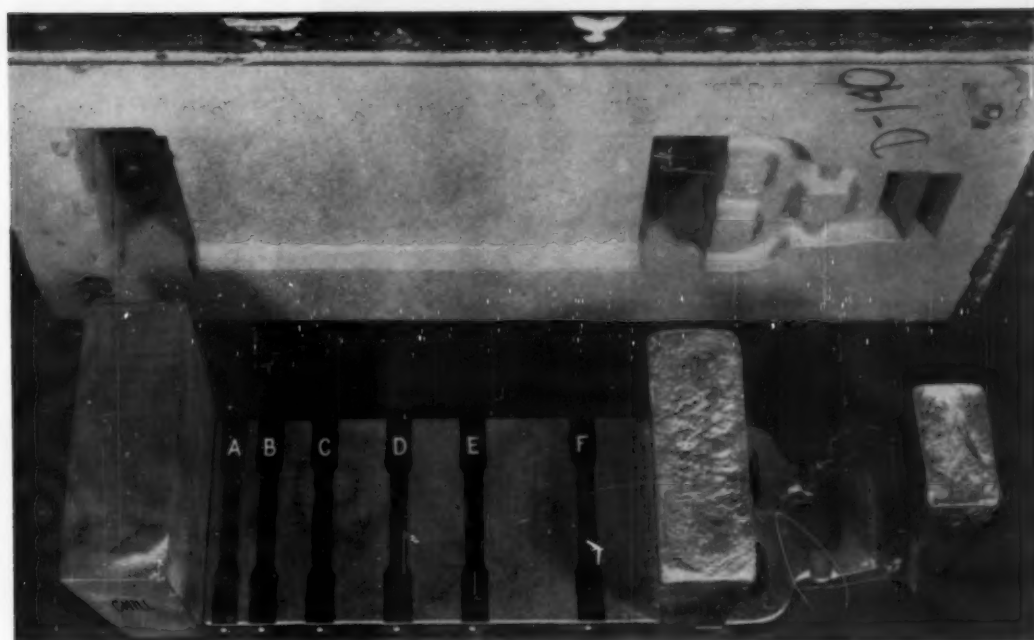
Test Slab and Cope Mold With Chill in Position at Left. Inked bars show locations where standard tensile specimens were machined.
